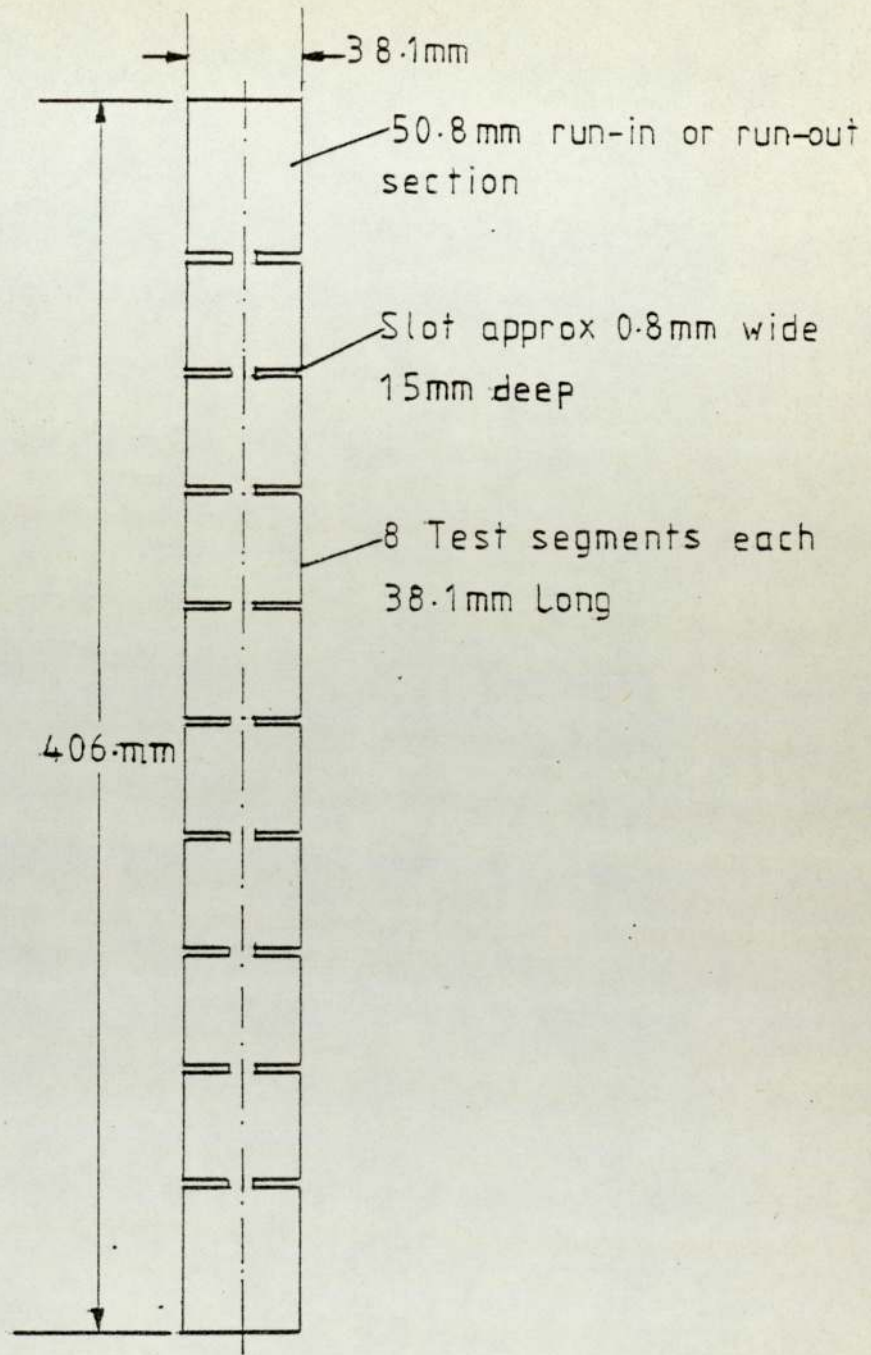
Huxley cracking test specimen<sup>7)</sup>.
